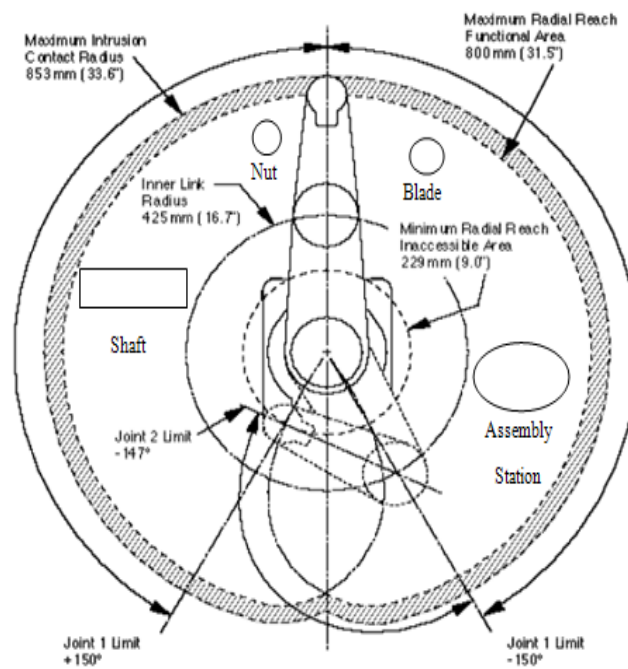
Workcell-1 for grinder assembly with Adept-one Robot
